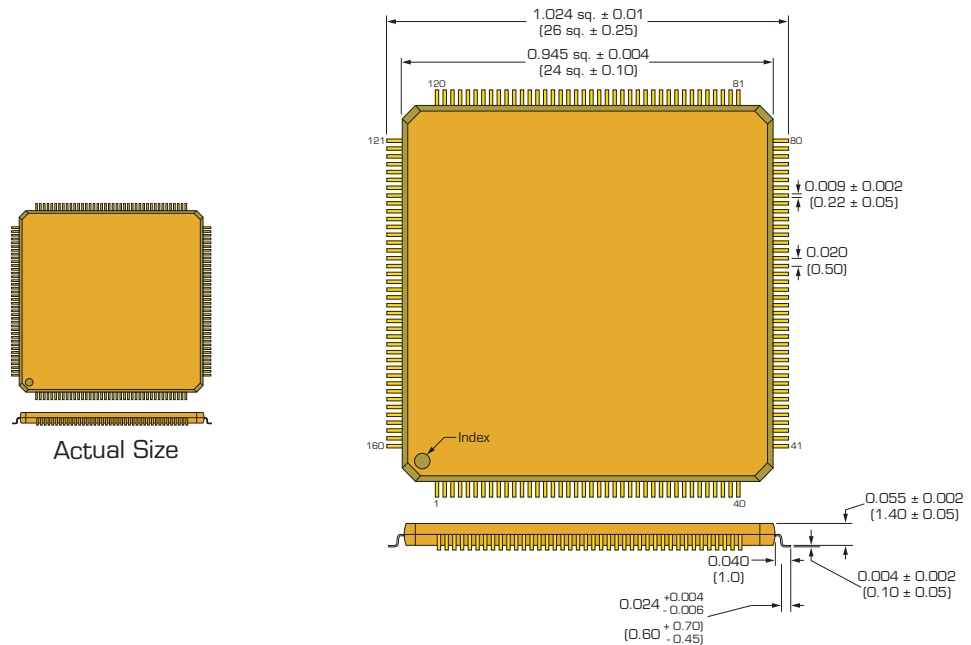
M3000F LQFP-160 Dimensions, Quad Package Top View
